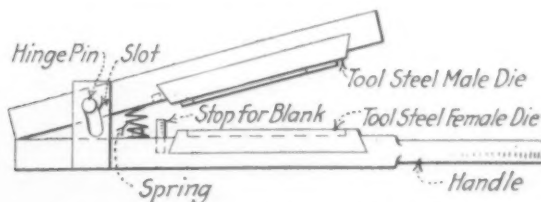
Tool Steel Male and Female Embossing Dies in a Hinged Steel Frame Are Used in the Latest Process. A crank press of 150 tons capacity furnishes the necessary pressure
